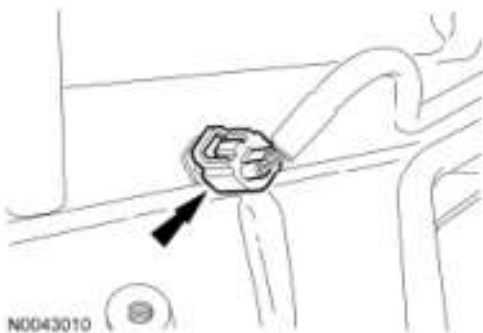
Locating Cylinder Head Temperature (CHT) Sensor Electrical Connector
